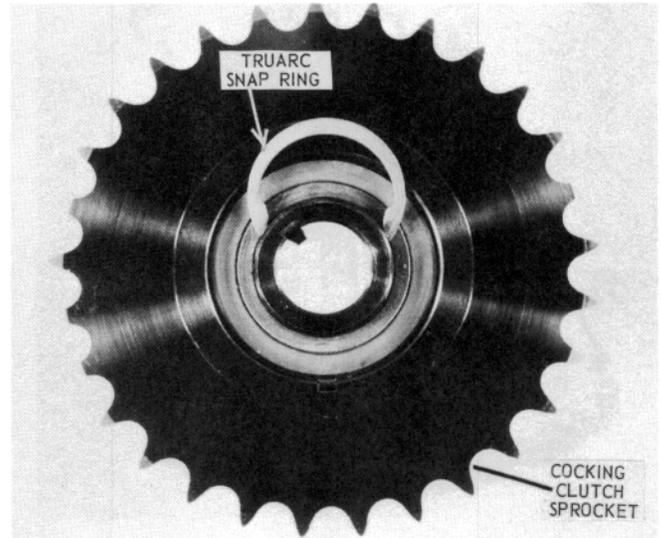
Cocking Clutch Sprocket and Snap Ring
